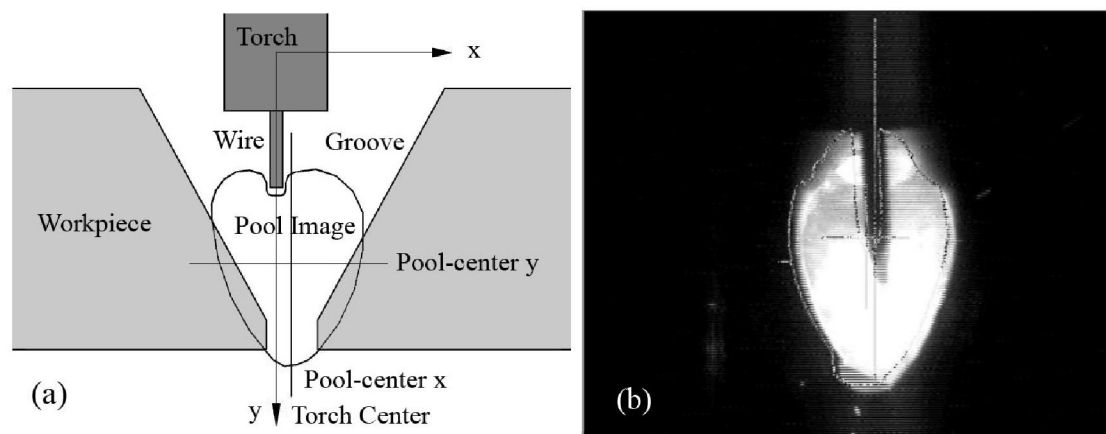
(a) Features extraction in weld pool image, (b) weld pool image [199]
